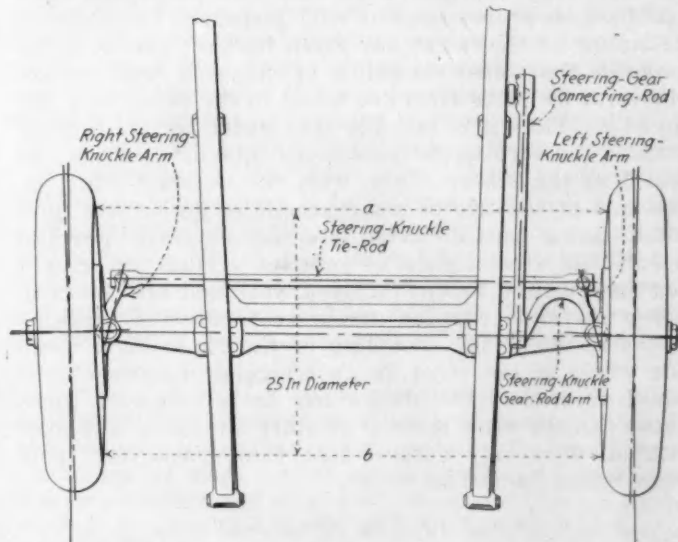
PLAN VIEW OF AXLE AND STEERING PARTS
